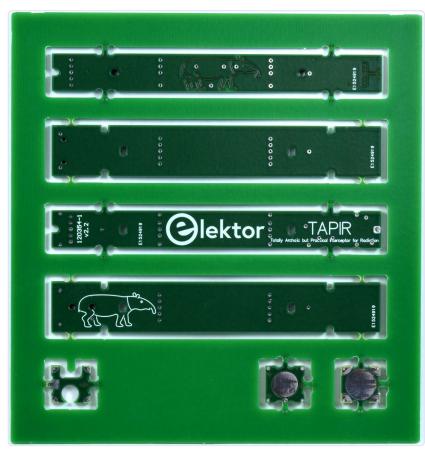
Bottom view of PCB breakout Panel 120354-1 v2.2 for the TAPIR E-Smog Detector.
